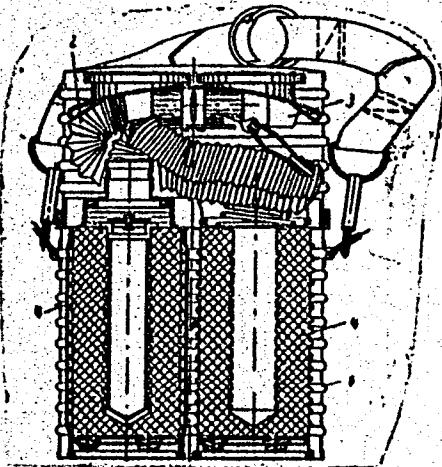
1- breathing box; 2- corrugated hose; 3- mouthpiece;
